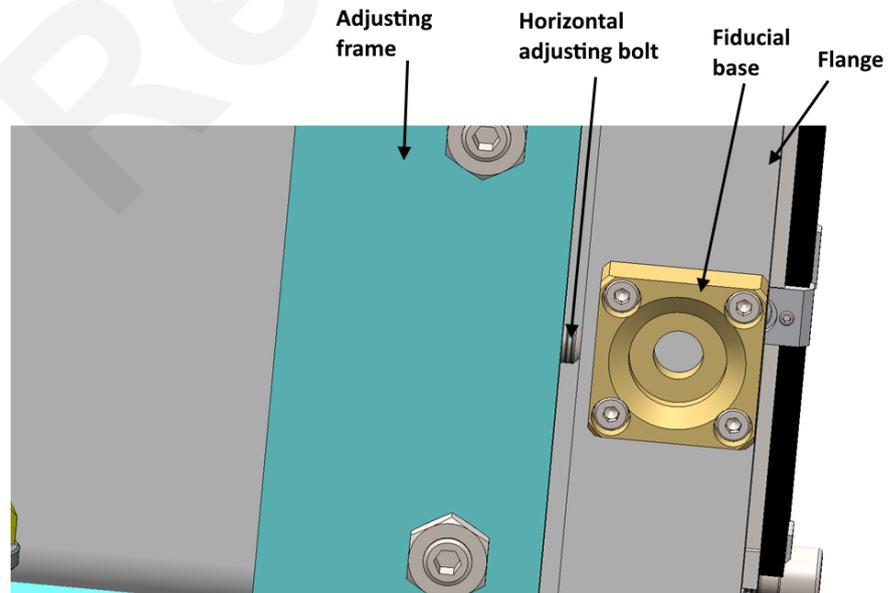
Horizontal adjusting of the housing through its flange with bolts inside the adjusting frame.
